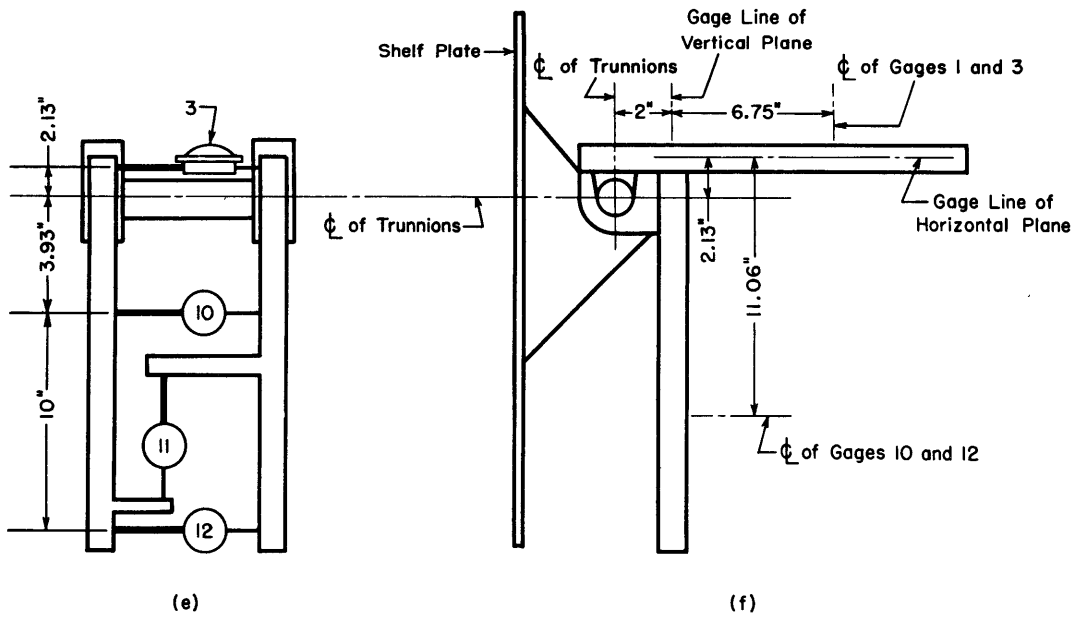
Arrangement of Deflection Gages in Plane Parallel to Pan Plate
